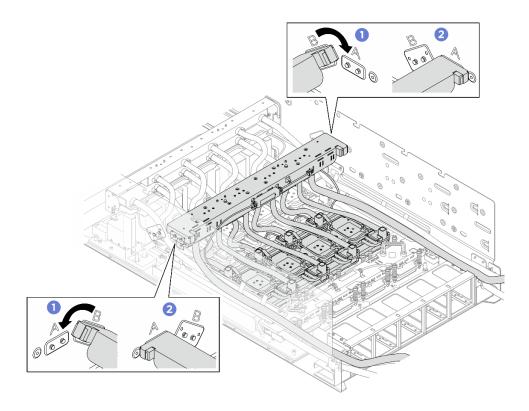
Repositioning the rear H100/H200 GPU cold plate module manifold
